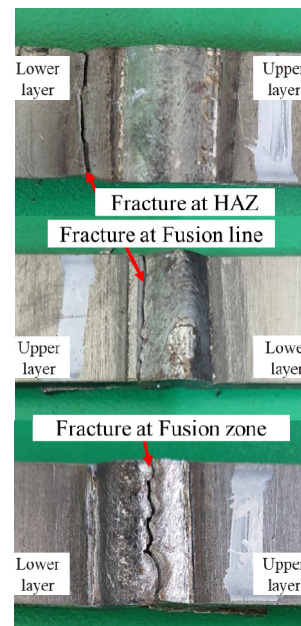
Types of fractures resulting from tensile strength testing of CMT welding specimens
